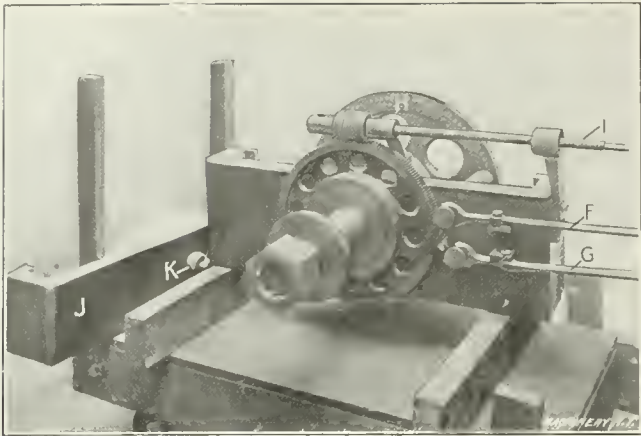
Gear Indexing Mechanism Removed from Planer to show Details
